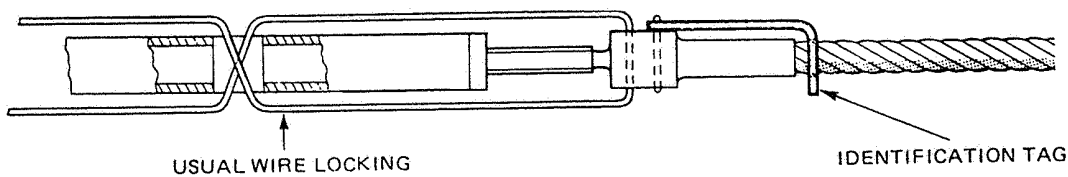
CABLE ASSEMBLY IDENTIFICATION
